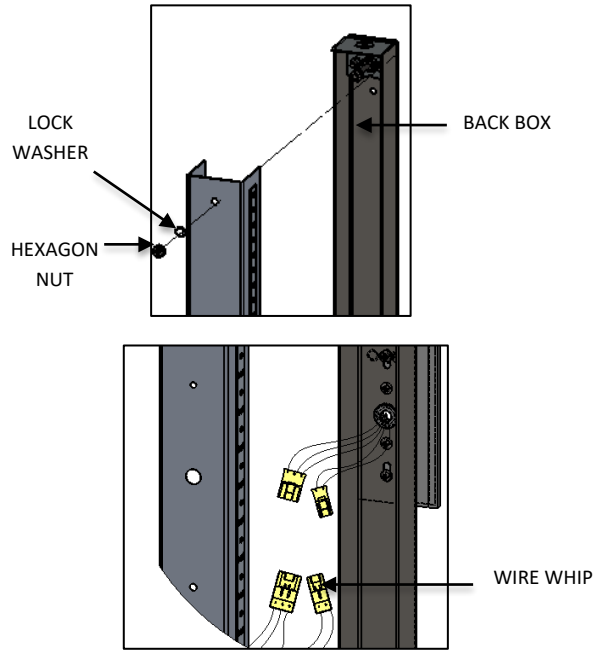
DETAIL VIEW SHOWING REFLECTOR PLATE AND WIRE WHIP DISASSEMBLY INFORMATION
